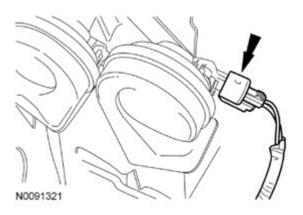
Locating Horn Electrical Connector Courtesy of FORD MOTOR CO.
